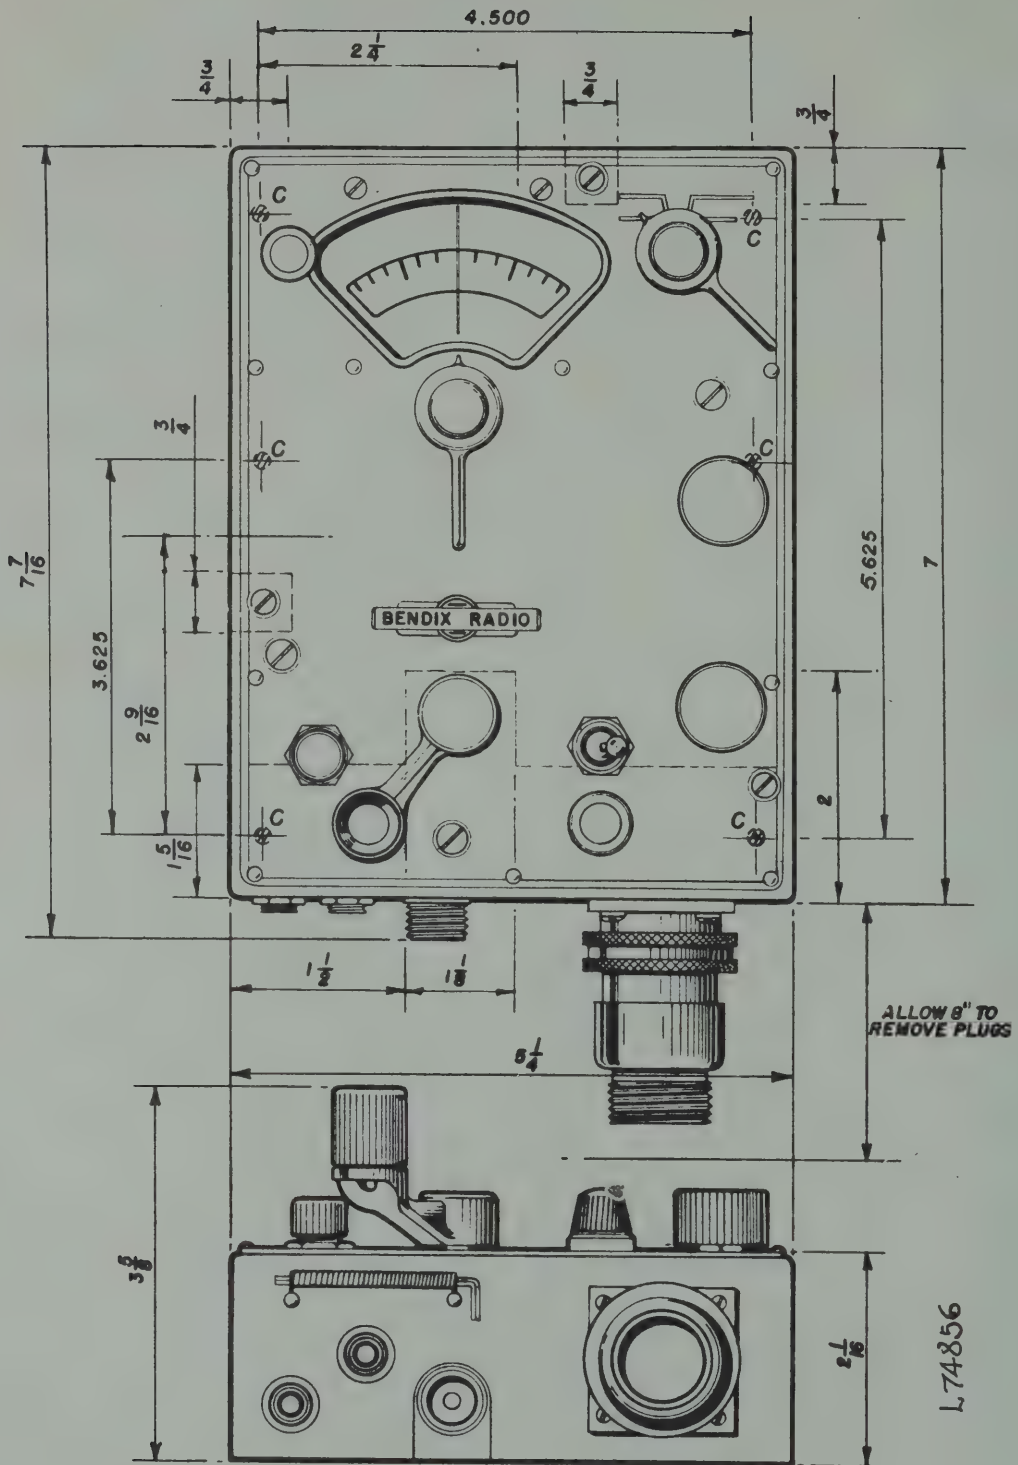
to 23 show the necessary dimensions for mounting of the components.
